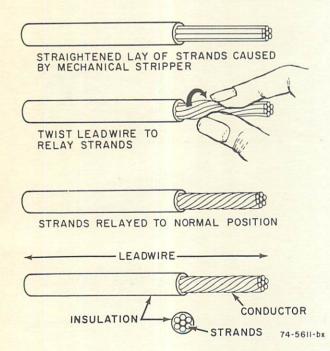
Proper Method for Removing Insulation – Stranded Wire.
